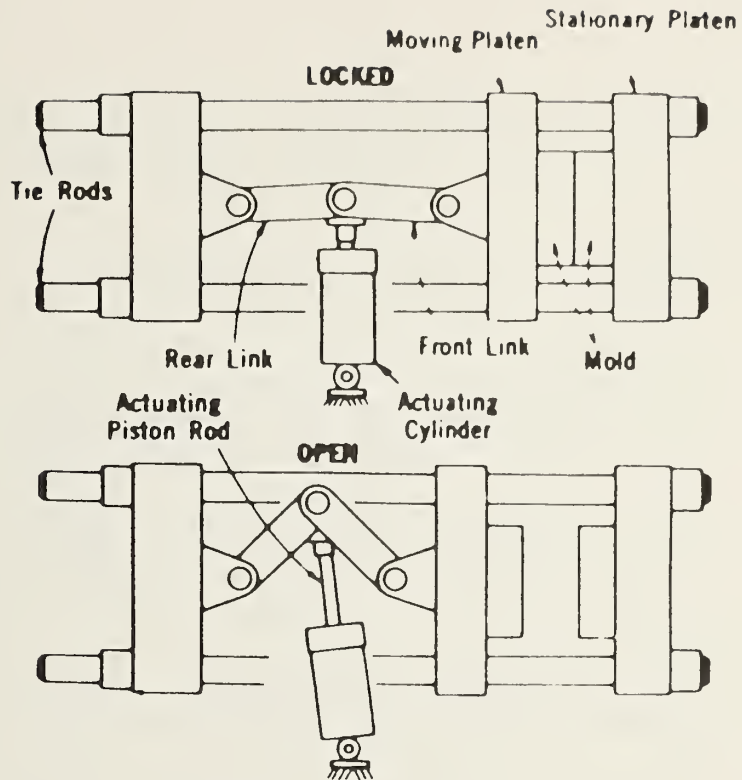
EXAMPLE OF A TOGGLE CLAMP
